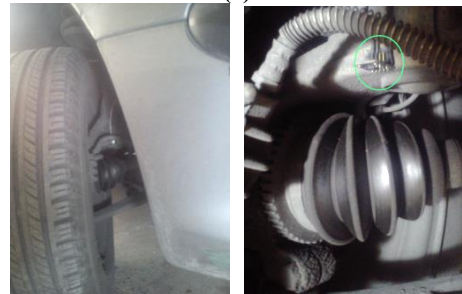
Defected parts (spring and shock absorber) front wheel suspension
